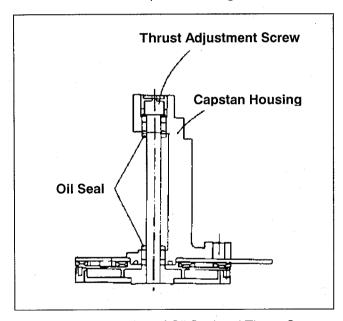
Location of Oil Seal and Thrust Screw.
